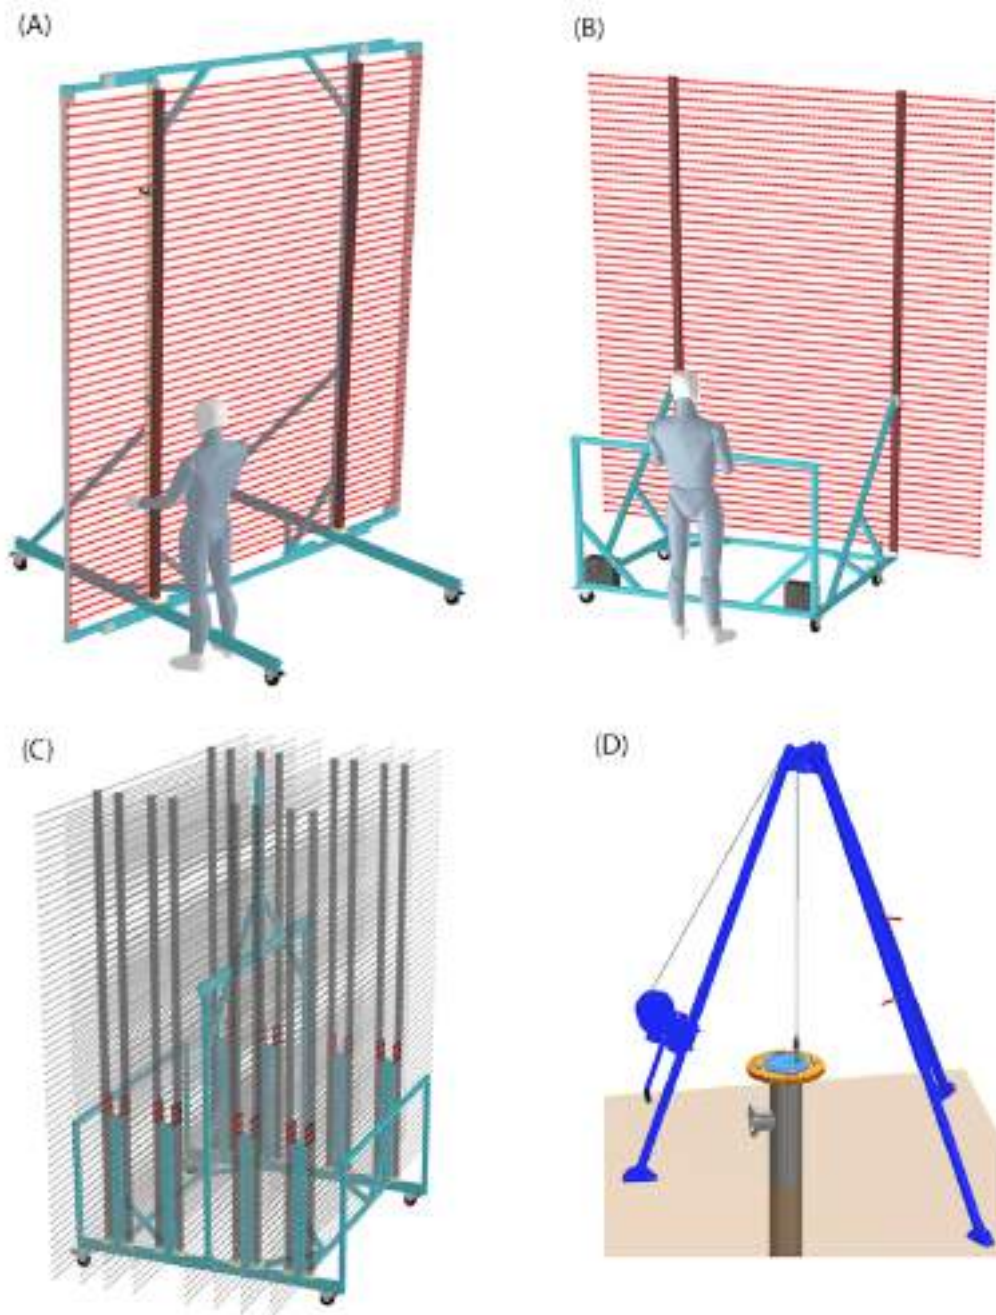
Tools for the field cage (FC) assembly and installation process - (A) FC module assembly station; (B) FC module installation cart; (C) FC module storage cart; (D) tripod for raising field cage supermodule assembly.
